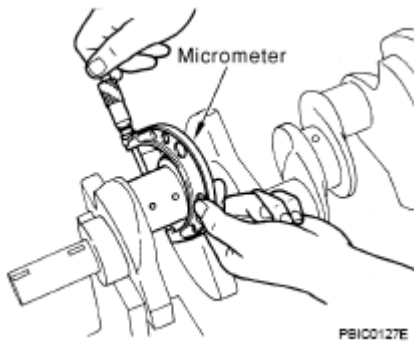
Checking Outer Diameter Of Crankshaft Pin Journal With Micrometer
